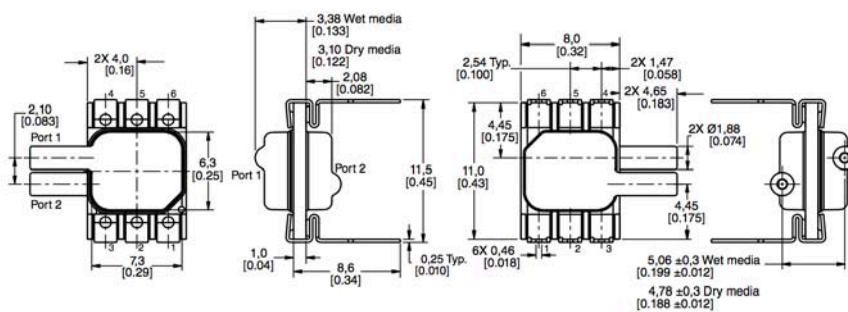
Package and dimensional drawings of 1psi and 5psi sensors
